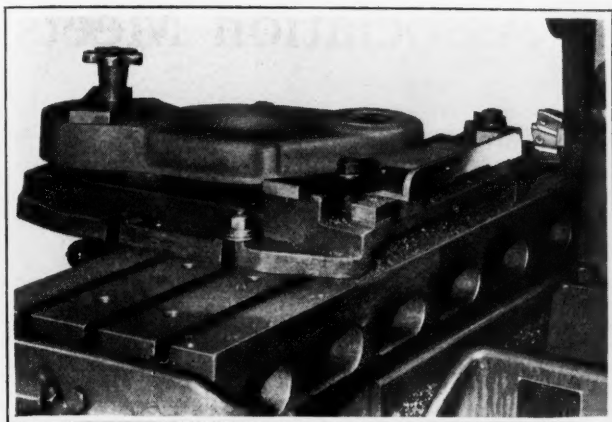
Milling Gear-case Cover Faces, over 12 Inches Long, in 30 Seconds
